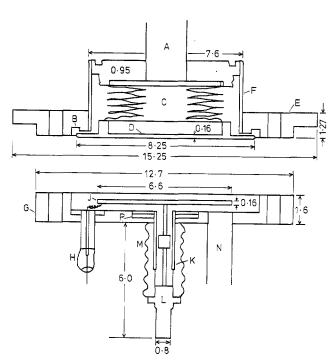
The capacitance manometer (all dimensions in centimetres). A, glass-to-metal seal to high-vacuum system; B, welding point between bellows and membrane; C, stainless steel bellows; D, upper membrane; E, upper flange; F, stainless steel tube; G, lower flange; H, leadthrough; J, movable circular plate; K, insulating sleeve; L, support for knurled knob and sleeve; M, stainless steel bellows for adjustment of plate; N, metal tube to reference system; P, pumping disc with holes.
